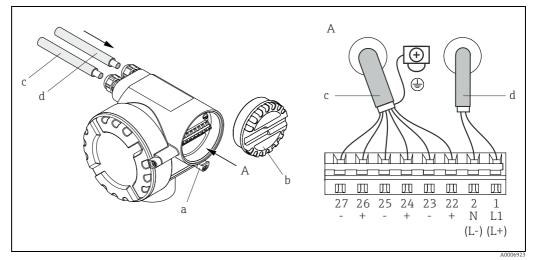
Connecting the transmitter, cable cross-section: max. 2.5 mm² (14 AWG)
